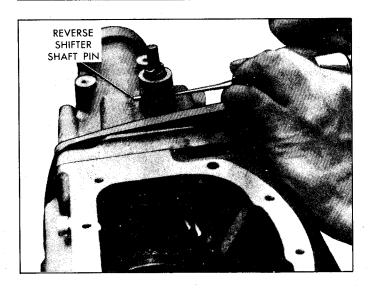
B-3K--Removing Reverse Shifter Shaft Lock Pin
